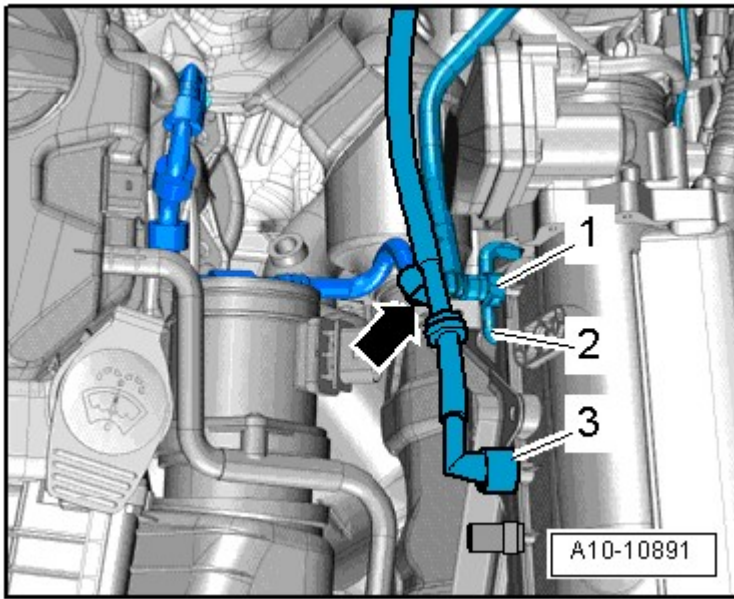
Identifying Vacuum Lines From Intake Manifold
